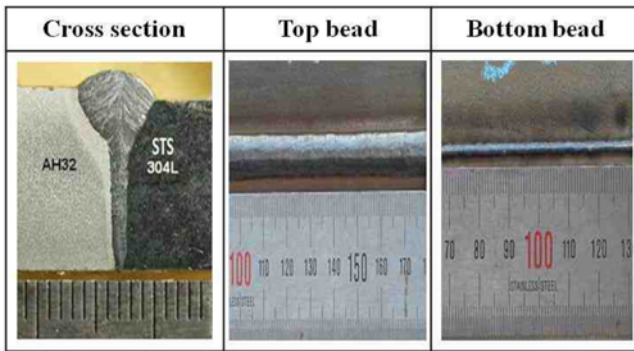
Bead surface appearance and cross section of AH32-ST304L hybrid butt welded joints
